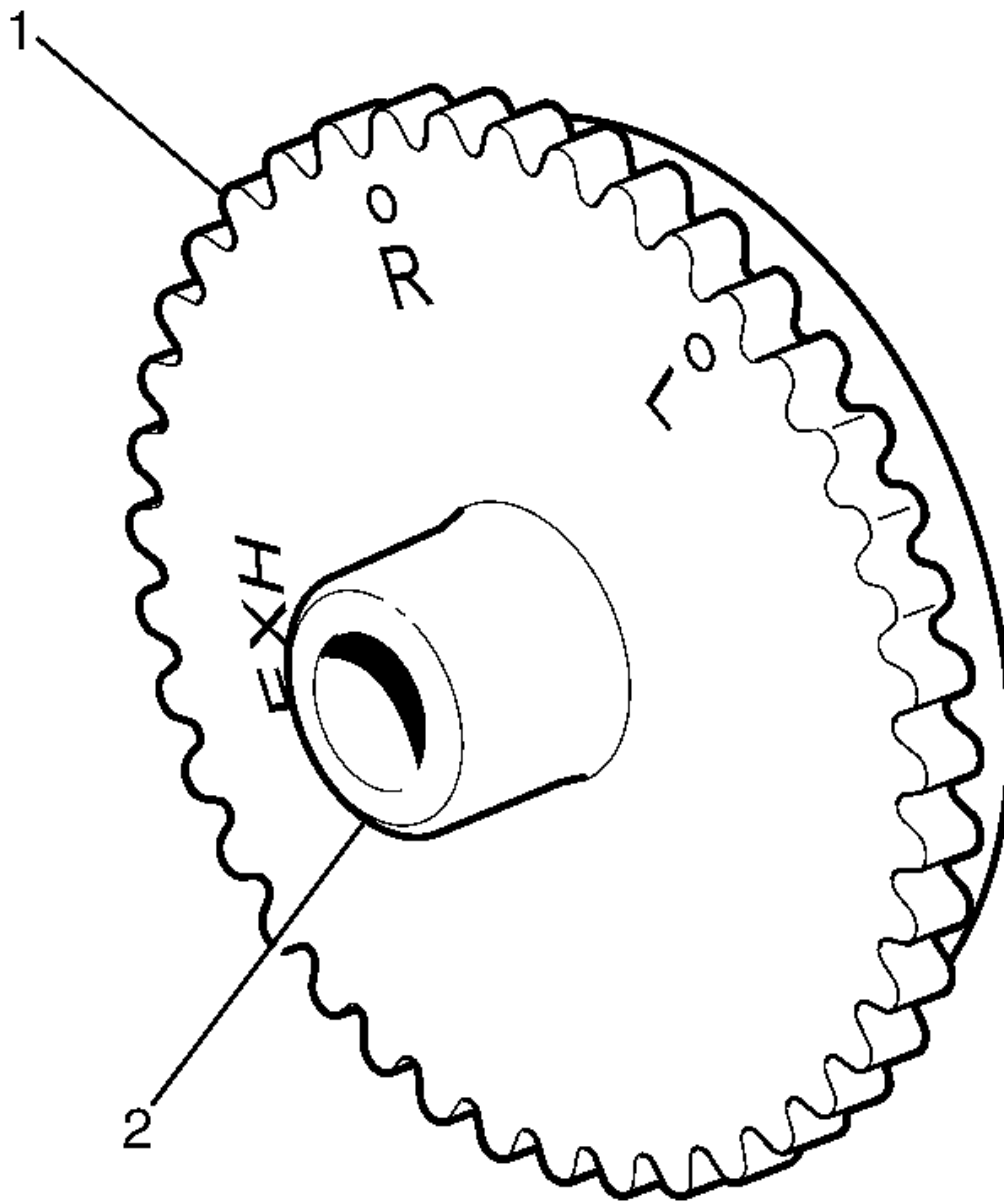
Identifying Back Of Intake/Exhaust Camshaft Position Actuators
